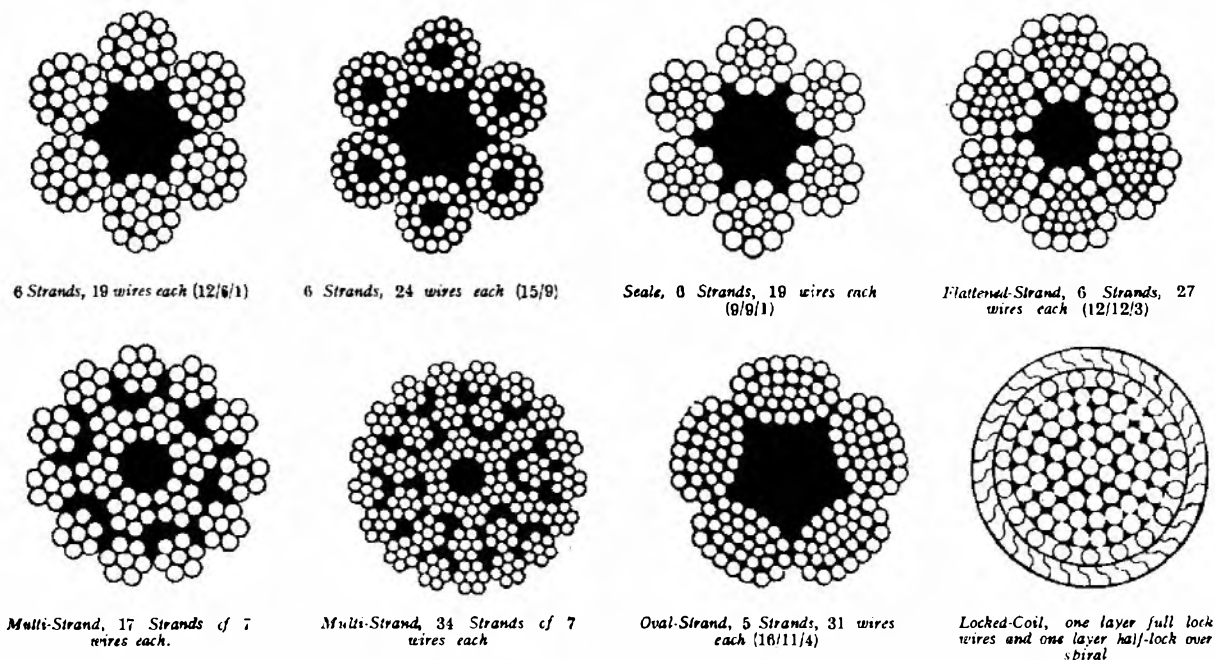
TYPICAL ROPE CONSTRUCTIONS.
